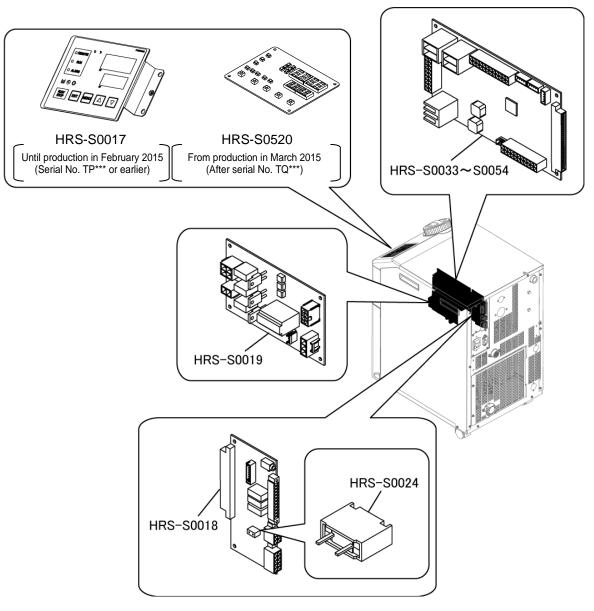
Main board / Communication board / Power board / Display board / Fuse
